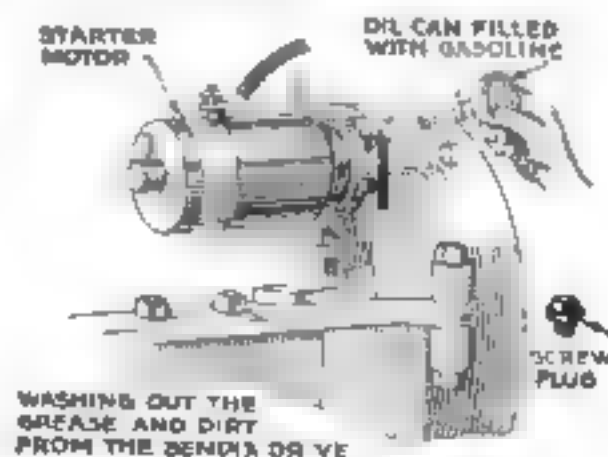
A simple method of cleaning the bendix drive without removing the starter motor.
